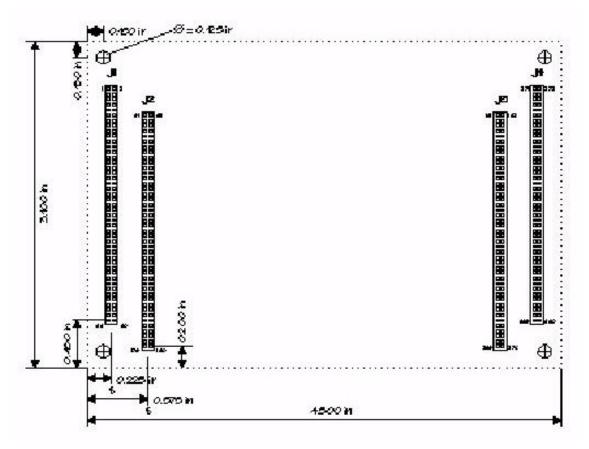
SHARCPAC Carrier Site Dimensions, Top View
